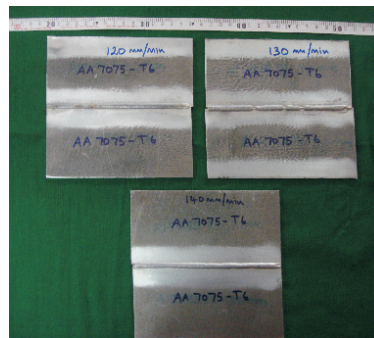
Macro image of the welded samples before welding at various speeds
